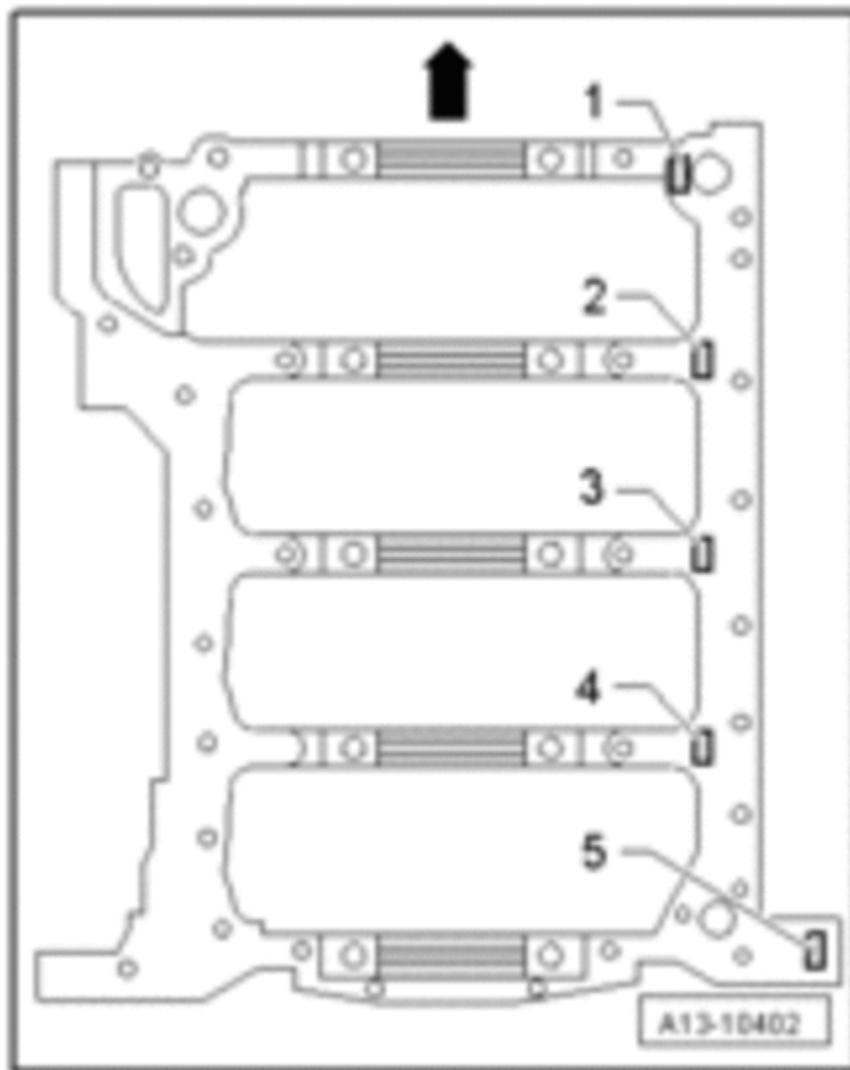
Allocation Of Crankshaft Bearing Shells For Cylinder Block
